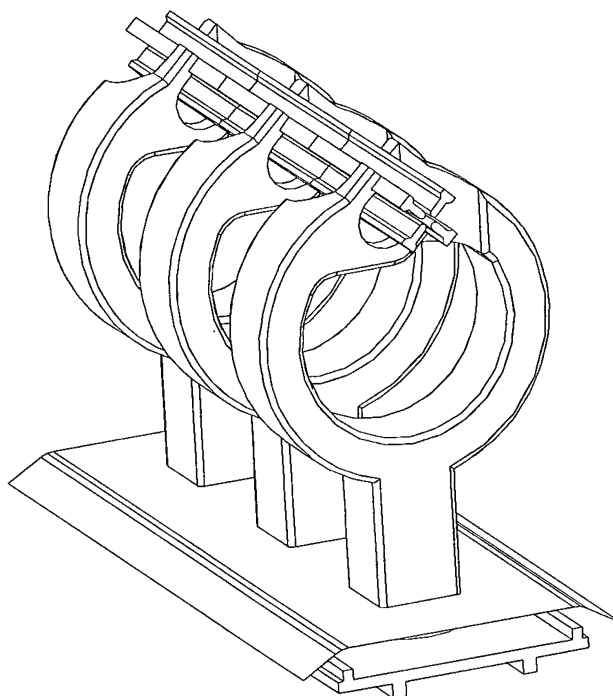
Schematic drawing of the split-ring 4-rod RFQ composed of three modules.
